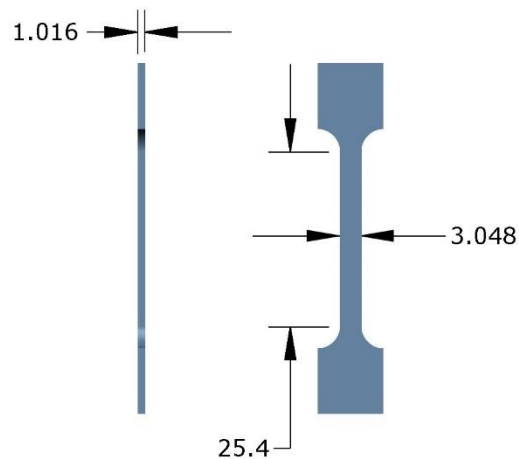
Material test sample geometry with key dimensions. (units: inches).
